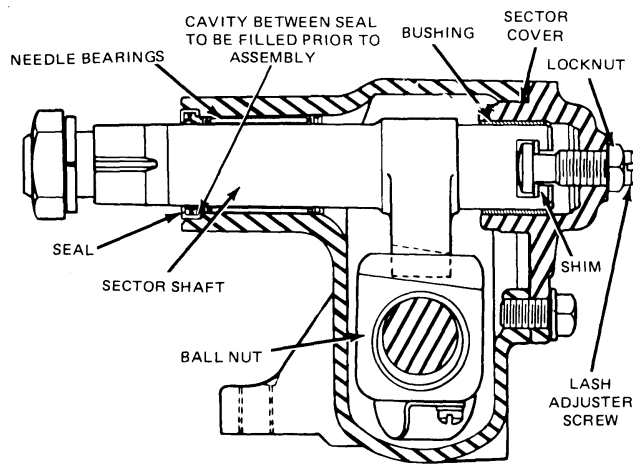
Manual Steering Gear—Recirculating Ball F-100—F-350 and E-100—E-350
